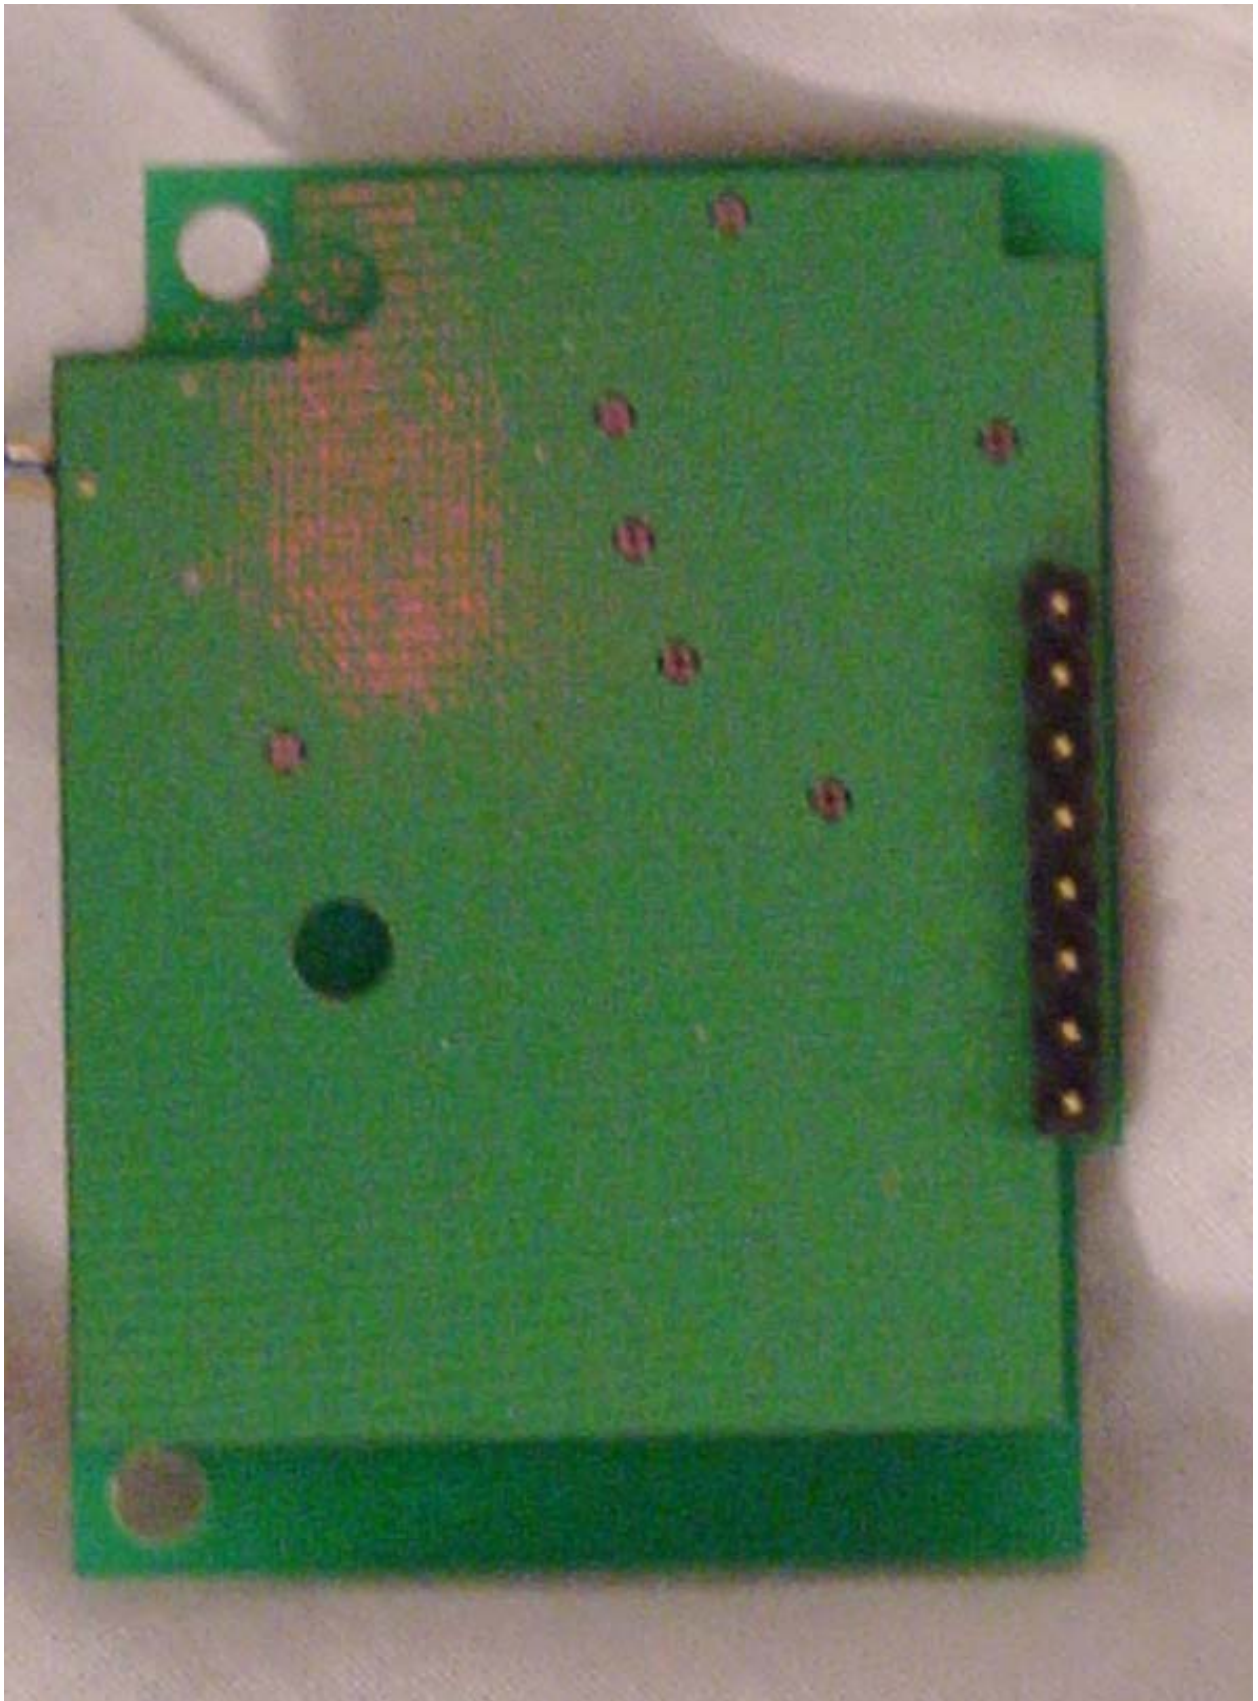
EUT, Laser Alignment Head CPU Board and TX Board Removed
